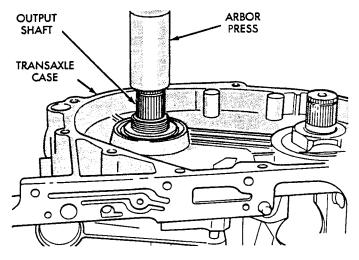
Use Arbor Press to Remove Output Shaft from Case
